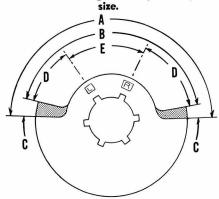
Drawing of rotary valve showing suggested modifications.
